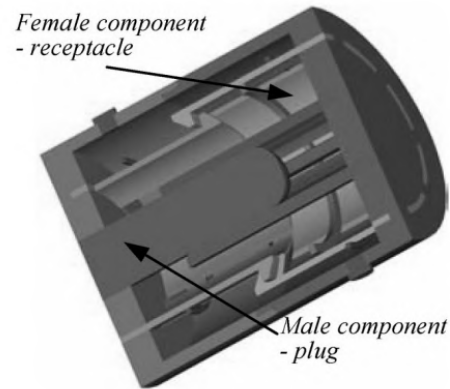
Cross-Section of the ACOR coupling mechanism [22]
